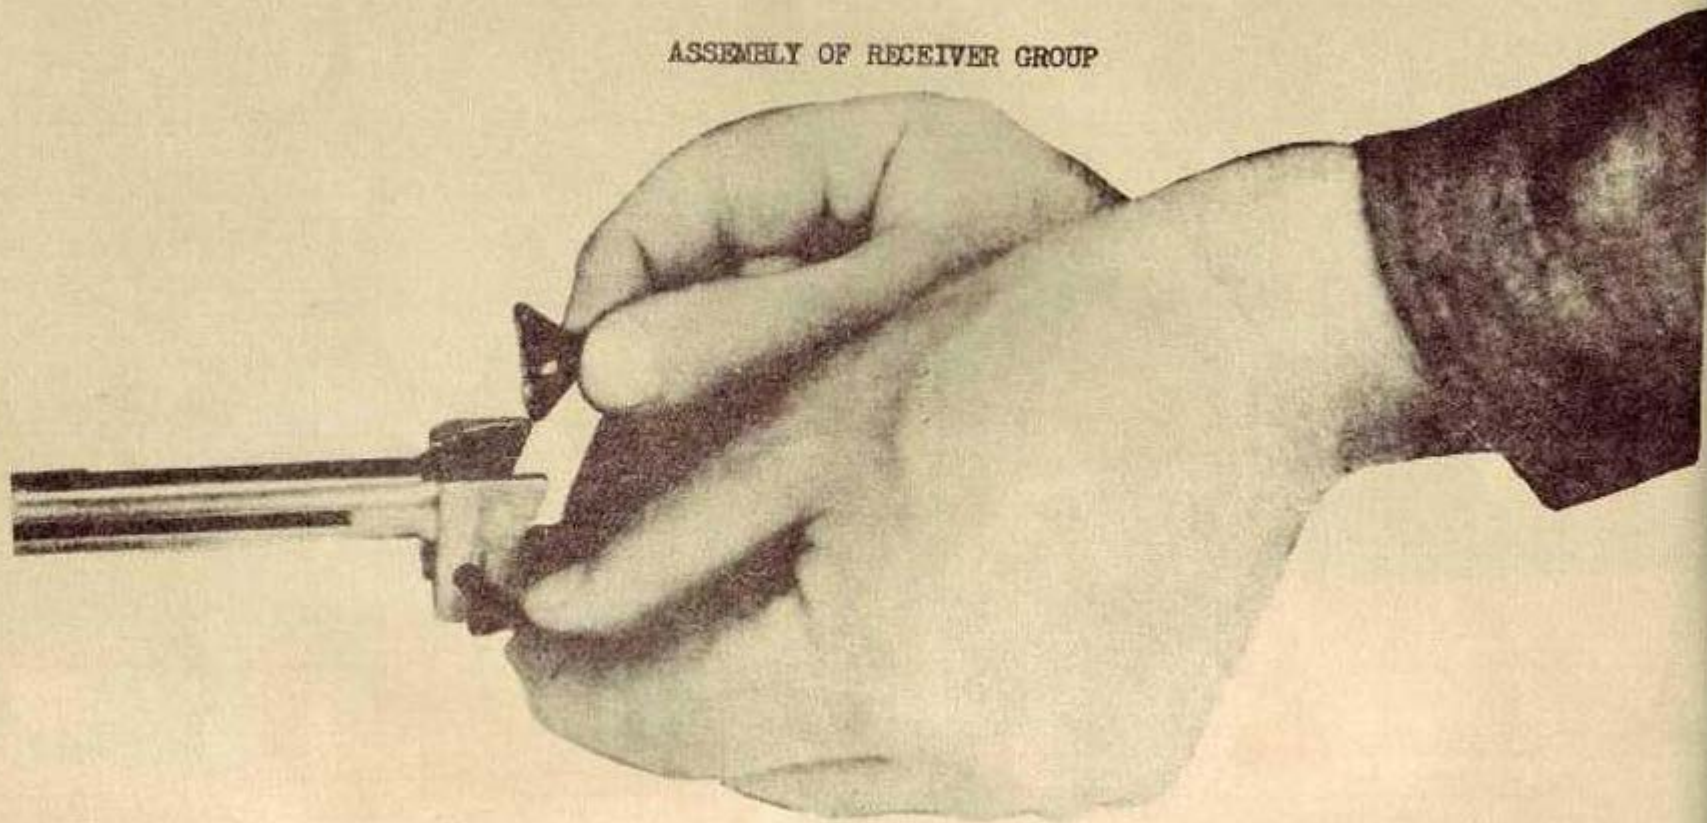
After the EXTRACTOR has been replaced (by sliding it in, lifting the head only enough to clear the stud) insert the FIRING PIN and SPRING in their recess in cylindrical part of BOLT. Place HAMMER in position with rounded edge upward and push HAMMER PIN into place.
